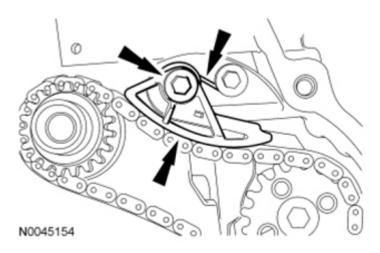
Locating Oil Pump Drive Chain Tensioner, Bolt And Tensioner Spring Courtesy of FORD MOTOR CO.
